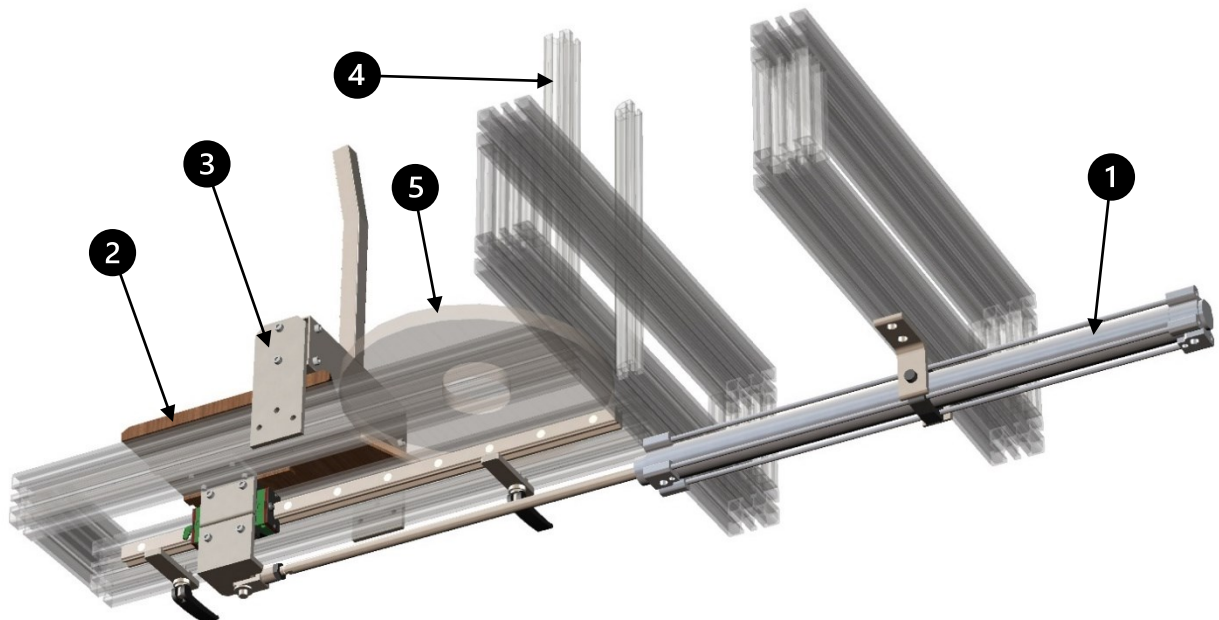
Blank disc loading and feeding mechanism. Bottom isometric view. (1) Cylinder. (2) Disc pushing plate. (3) Moving restrainer. (4) Fixed rests. (5) Blank disc.
